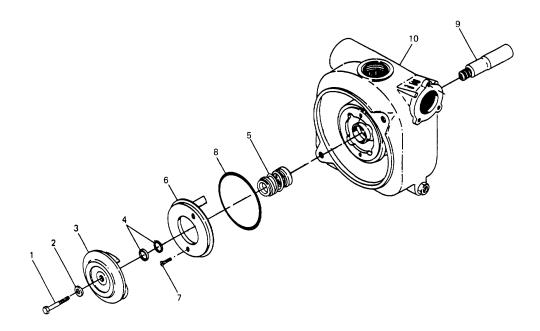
Replacing Impeller, Shaft Seal, and Shaft Adapter
